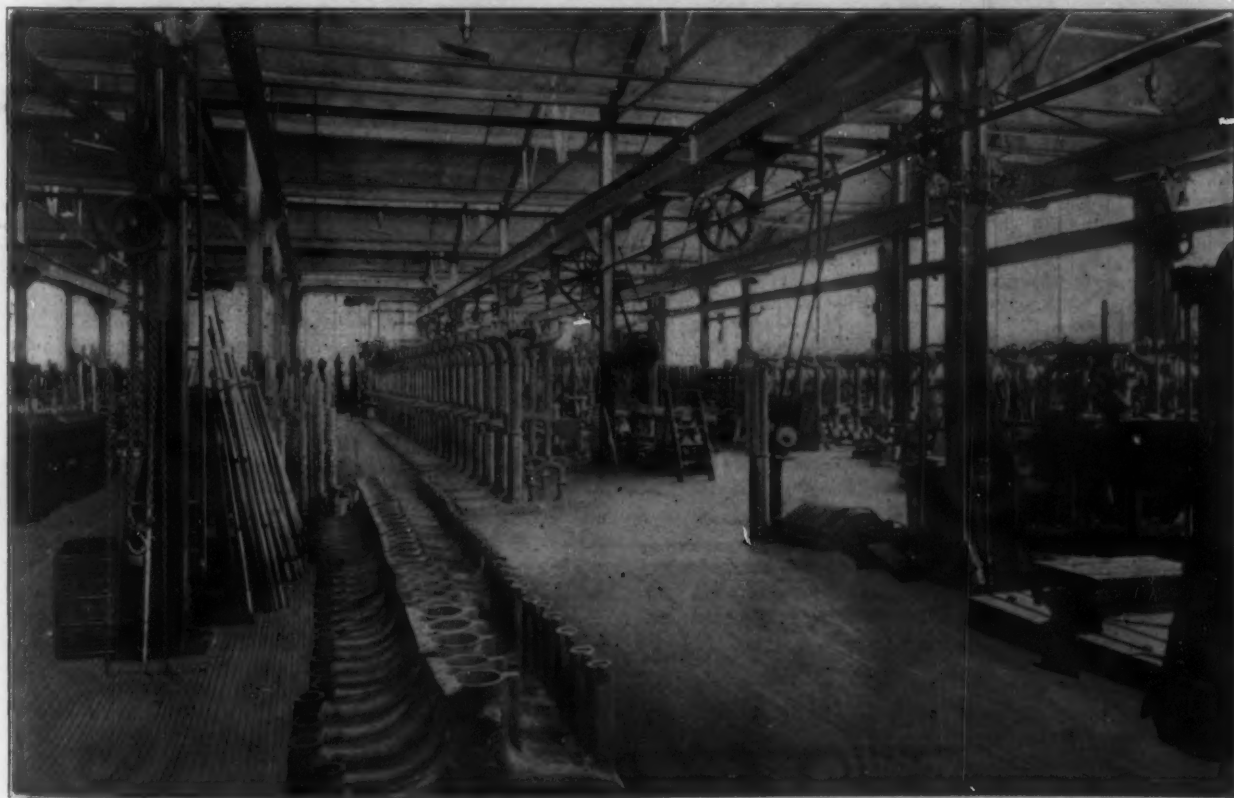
A View Showing Departments for Assembling and Testing Light and Heavy Upright Drilling Machines.
